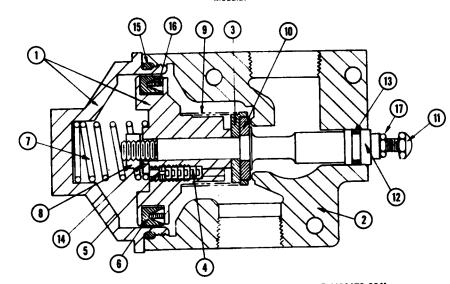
FLUSH VALVE ASSEMBLY WITH WHITE CAP (466172-001).
